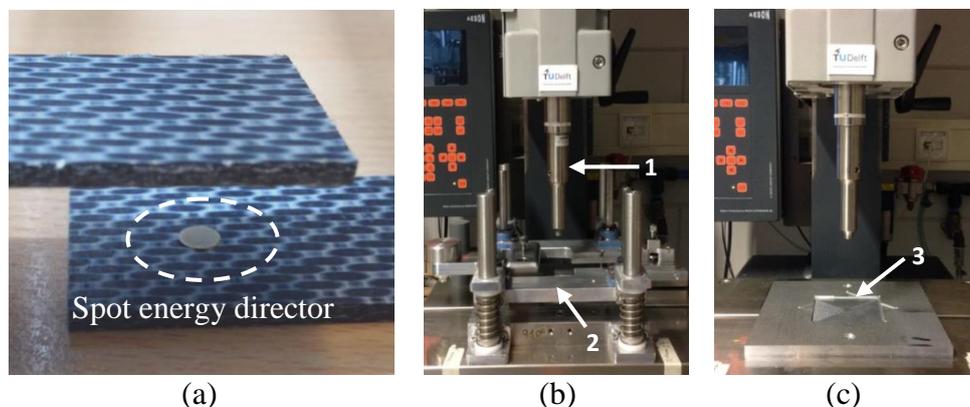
Spot energy director (a) and the ultrasonic welding machine (b and c) used in this study. 1: 10 mm-diameter-circular sonotrode, 2: welding jig for DLS samples, 3: welding jig for PT samples.
